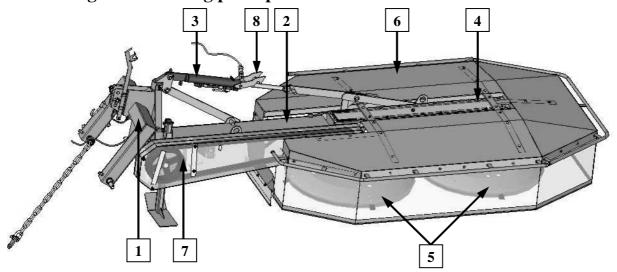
Parts of SaMASZ rear drum mower – flat cover
